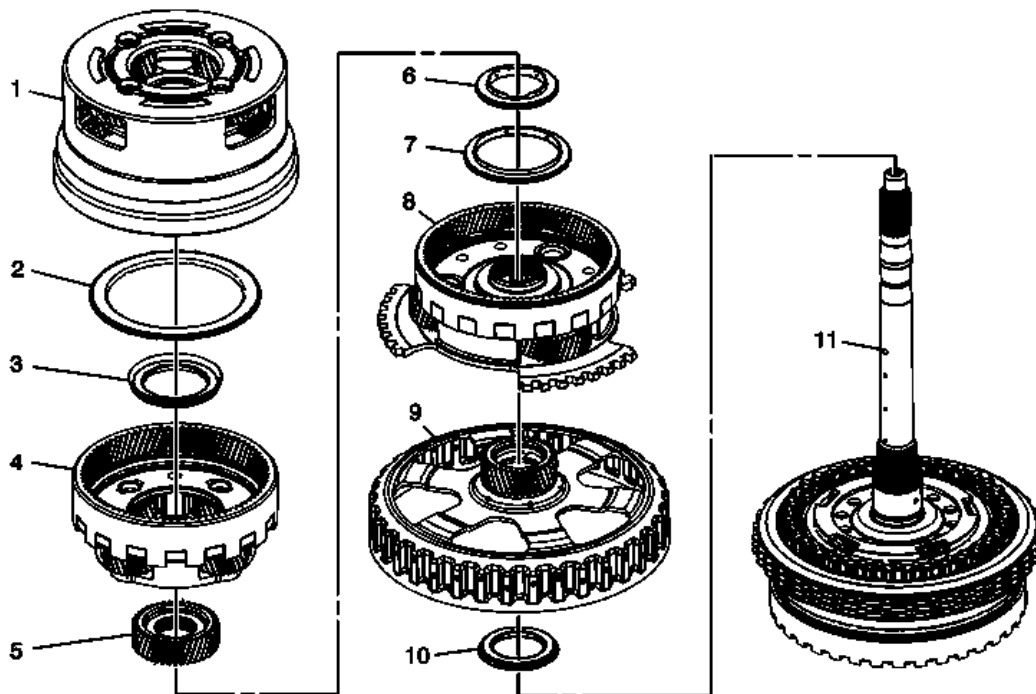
Disassembled View Of Input, Reaction & Output Carrier
